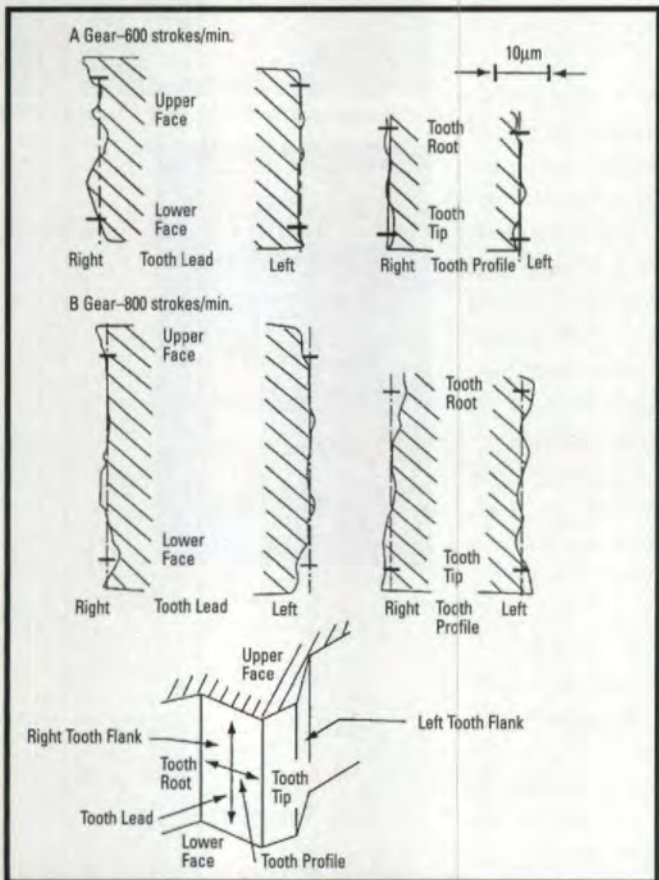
Accuracy achieved: AGMA 10 data points obtained from measuring gears cut on ST25CNC according to cutting conditions shown in Table 2.
